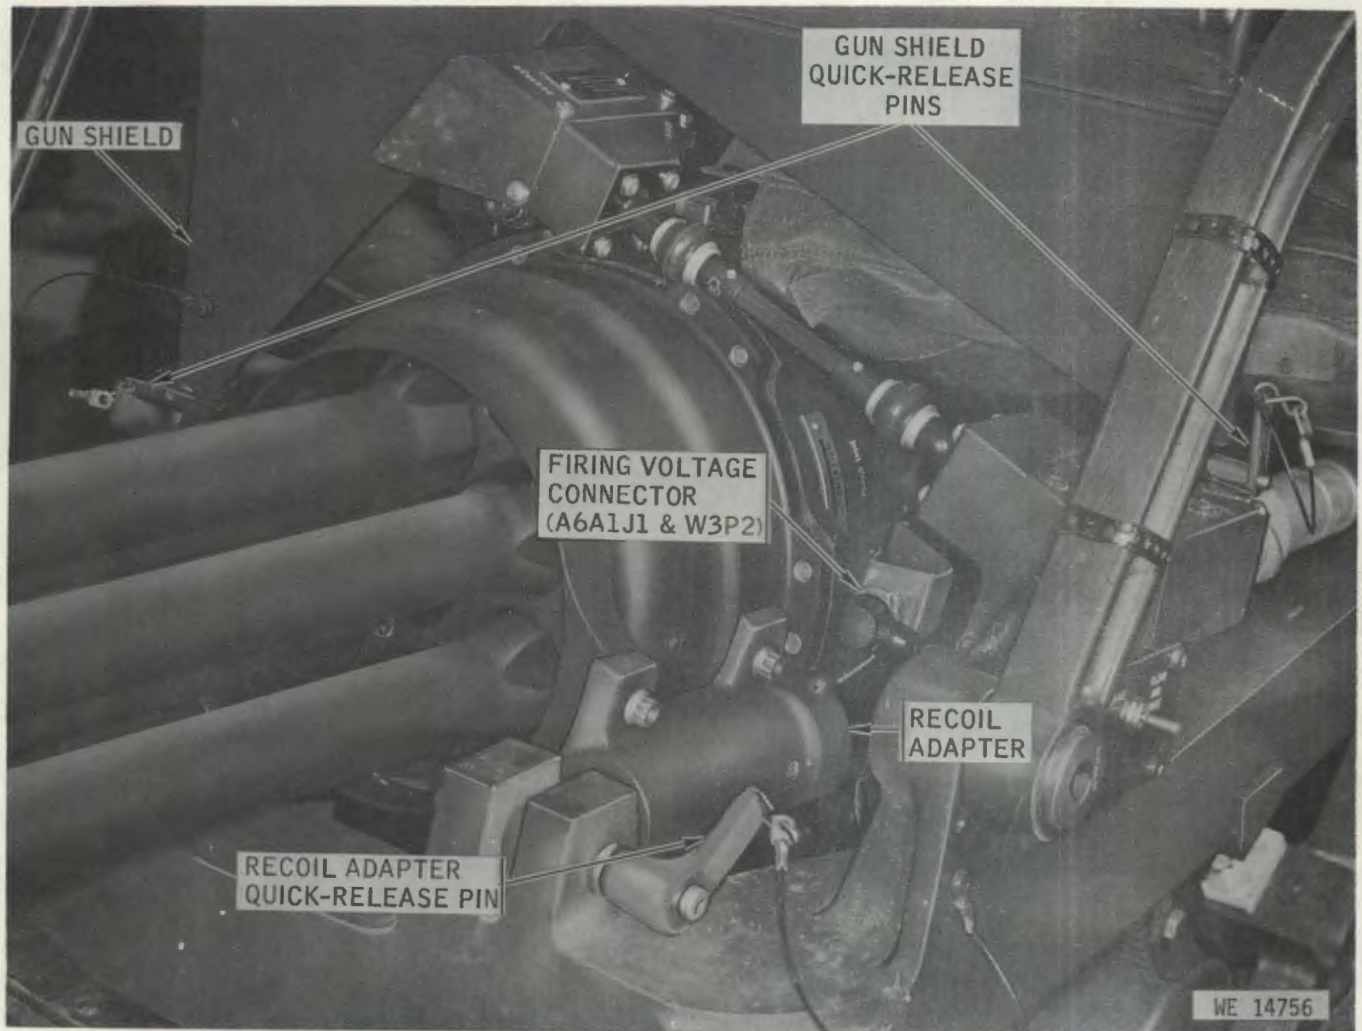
XM168 cannon and XM157 mount, front view, parts location.
